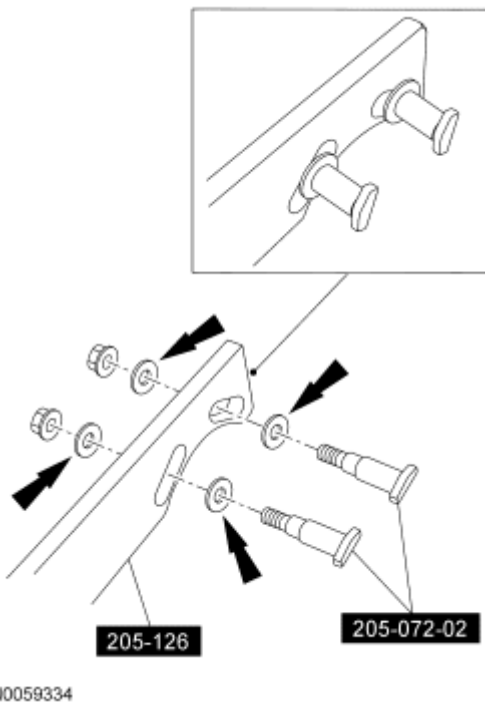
Assembling Special Tools (205-126 And 205-072-02) And Hardened Washers
